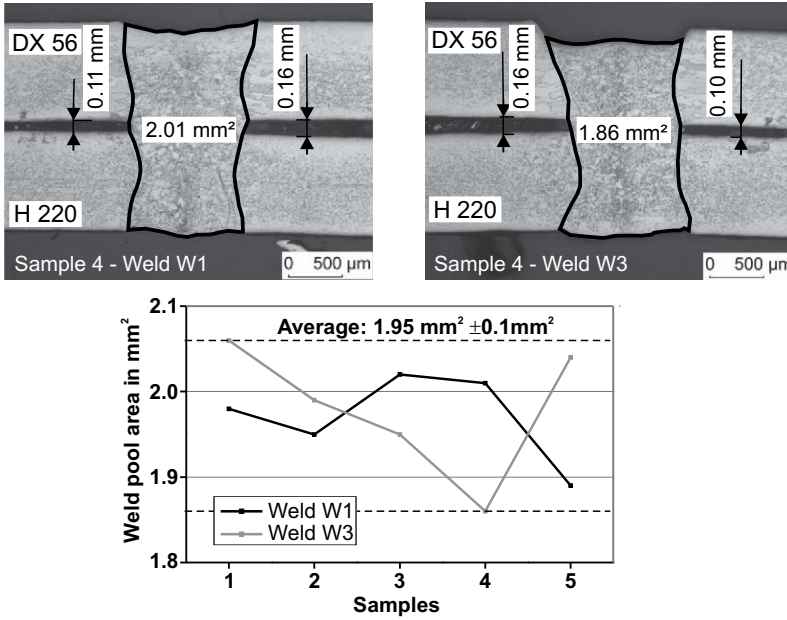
Experimental scatter band of the fusion zone area in cross-section, wheelhouse welds W1 and W3, laser beam welding, sheet thickness 1 mm, $q = 3.3 \text{ kW}$ and $v_s = 300 \text{ cm/min}$
